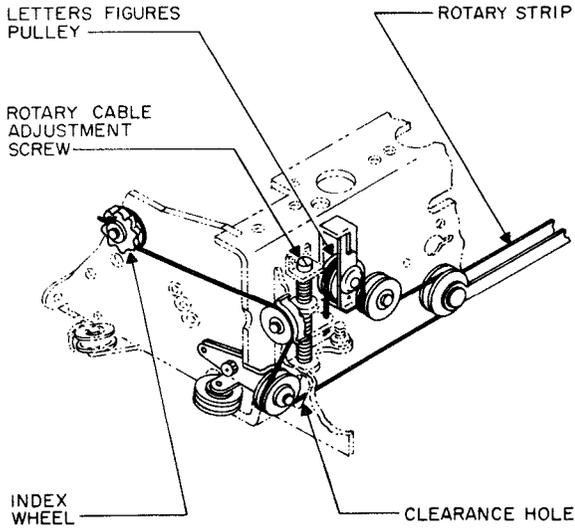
Rotary Cable Installation, Cable Threading Diagram
